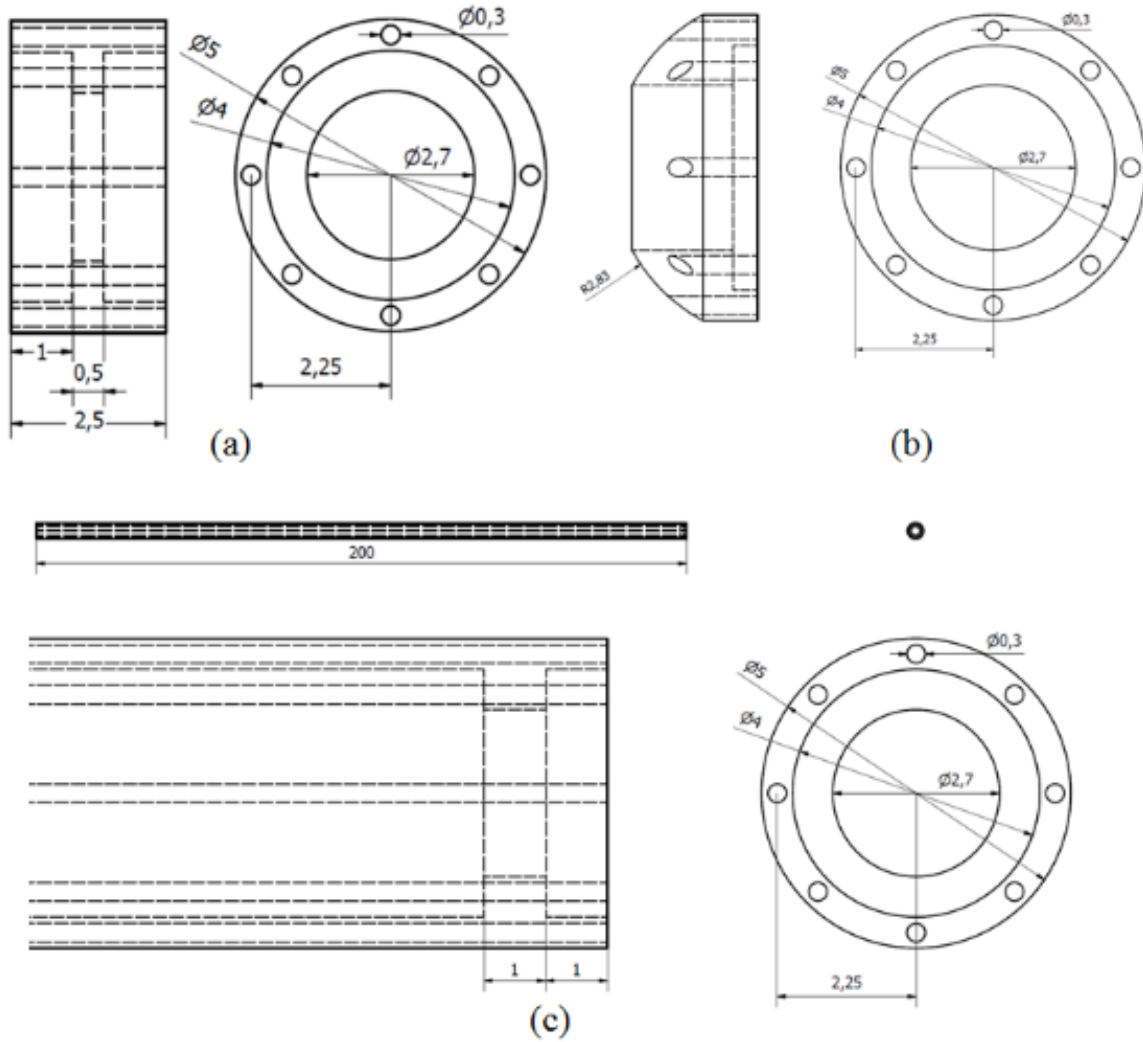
(a) The flexible part combined with driving part. (b) The three component of flexible part. (c) Detail view of cylinder in the flexible part.
